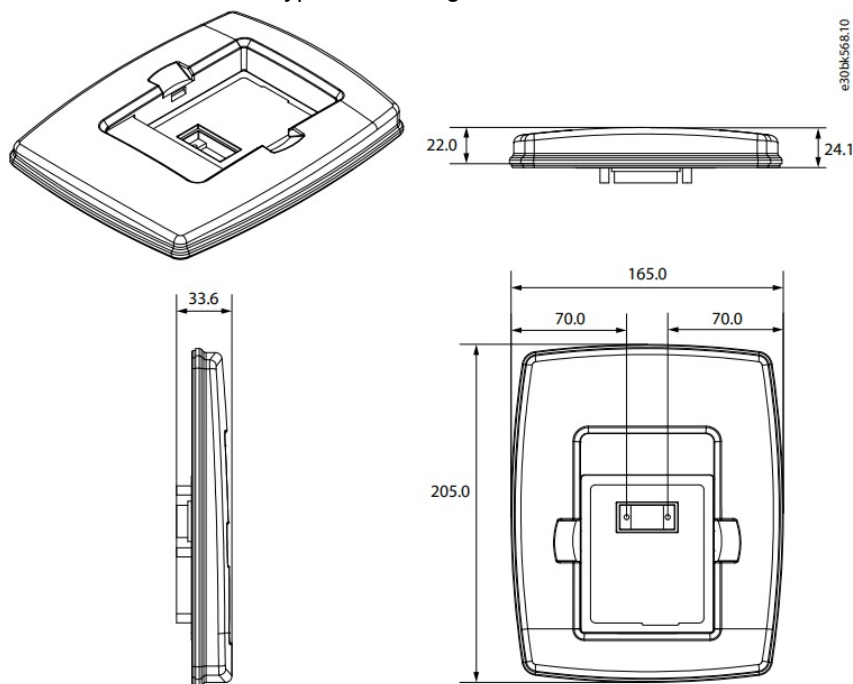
Door Keypad Mounting Unit, Dimensions in mm
